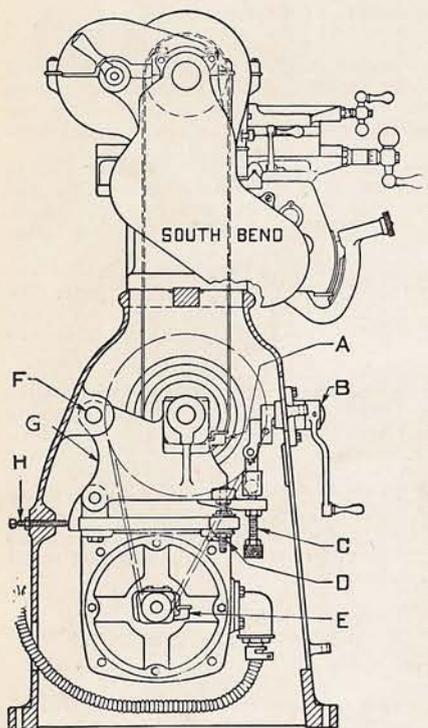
Cross Section End View of Underneath Belt Motor Driven Lathe.
